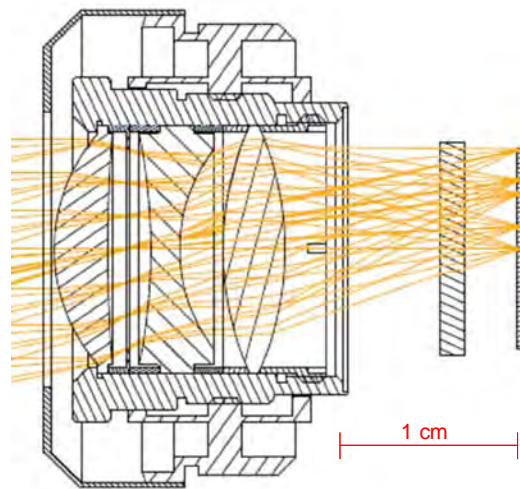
Mechanical drawing for lens barrel assembly. The flat elements on the right are internal to the InGaAs camera. The volume of the assembly is 8.4 cm^3 .
